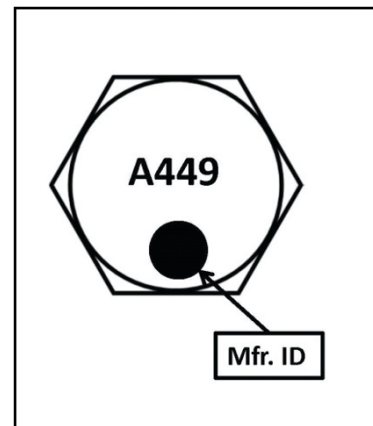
EXAMPLE OF ASTM A449 HEAD MARKING
